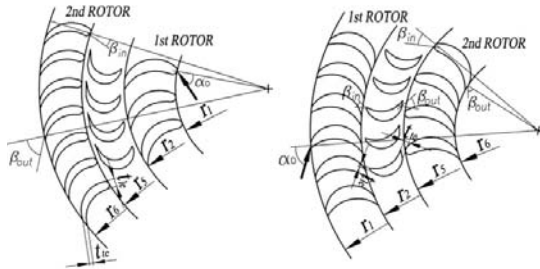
Definition of the geometric parameters on the radially outward [left] and inward [right] spouting turbine rotor
